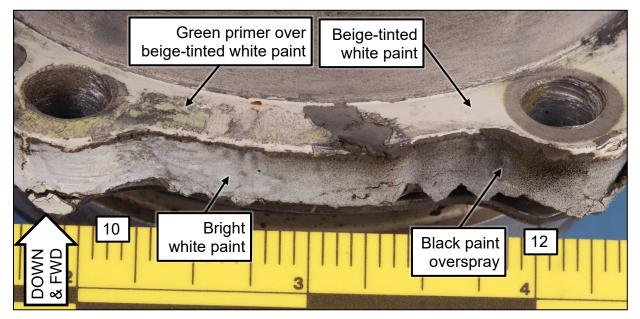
Input quill sleeve flange between the 10 o'clock and 12 o'clock mounting holes showing the mounting surface (vertical stabilizer side) and adjacent exterior surface.
